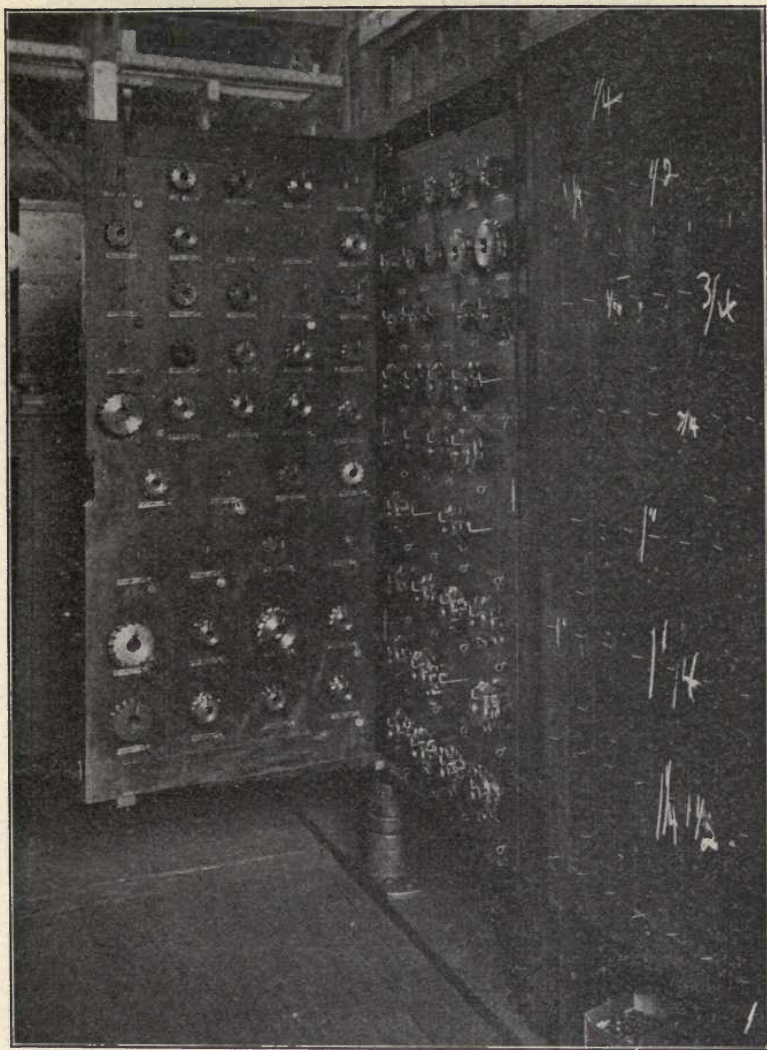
Tool-room section made up of a swinging-door cabinet, containing six doors, which swing in and out, giving twelve surfaces for stocking tools. This arrangement facilitates convenience in handling, and permits stocking the greatest number of tools for the floor space occupied. The tools are carried on screw hooks, and beneath each hook is placed a brass plate giving the size and symbol of the tool, and in close proximity to the plate is located the check hook for carrying the workman's check.
